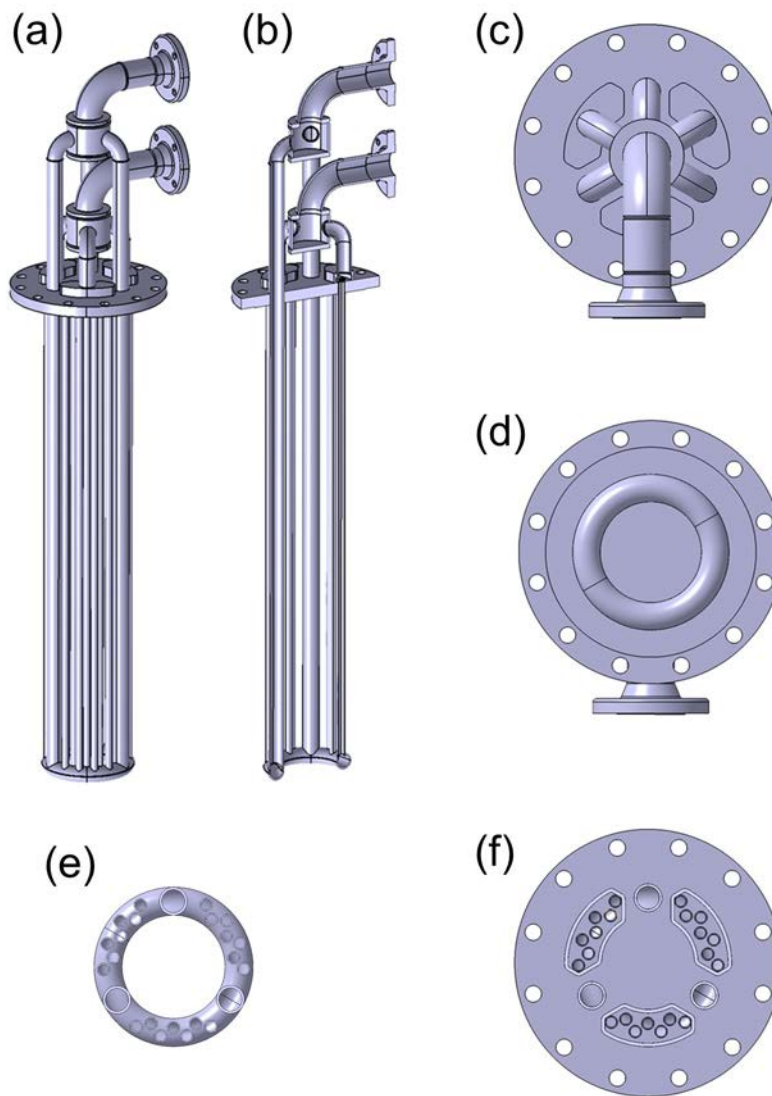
Three-dimensional model of PILLAR heat exchanger tube side in several viewpoints. (a) Isomeric view, (b) cross-sectional view in axial direction, (c) top view, (d) bottom view, (e) cross-sectional view of lower chamber, and (f) cross-sectional view of upper chambers
